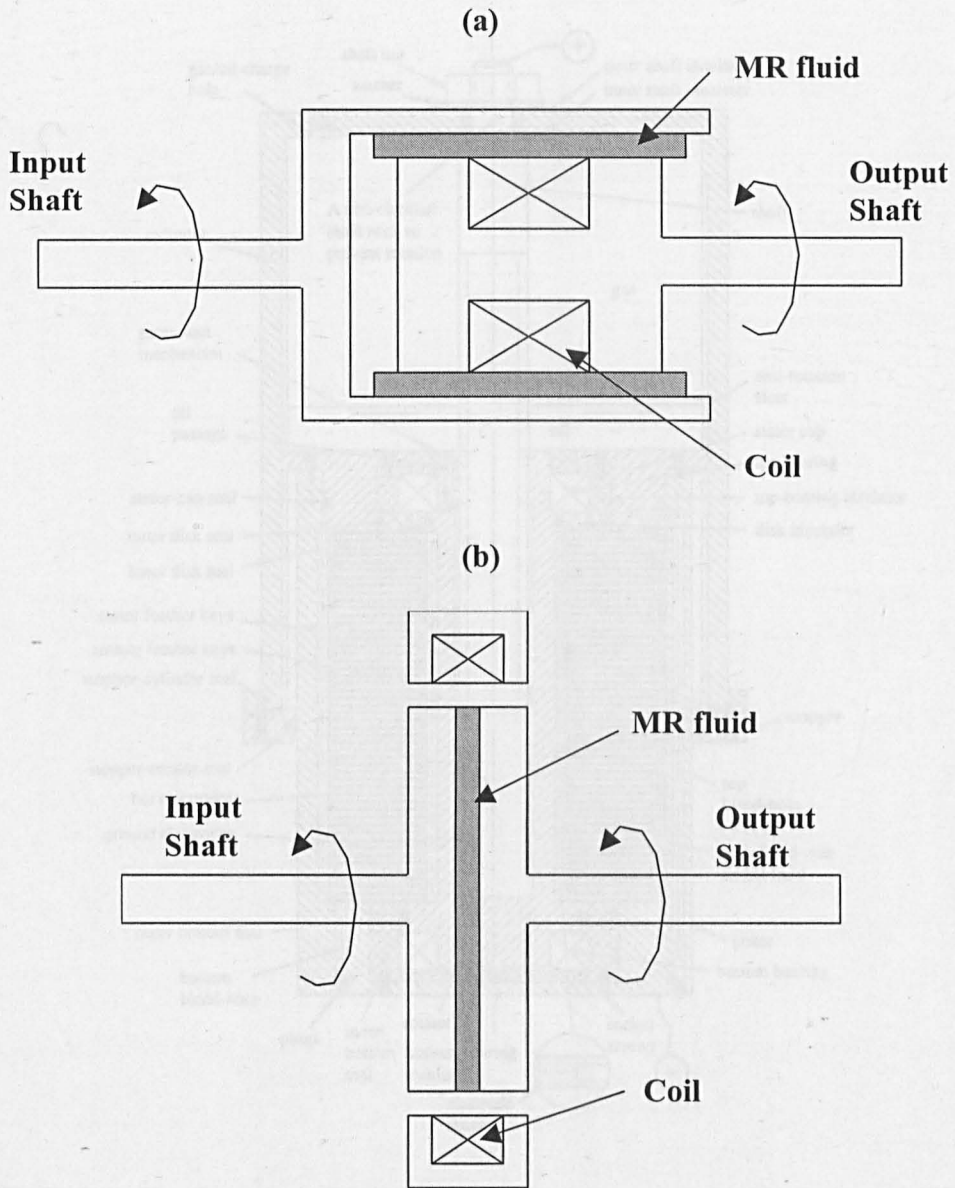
Shear mode rotary clutches [43]. (a) Cylindrical design, and (b) disk shaped design.
